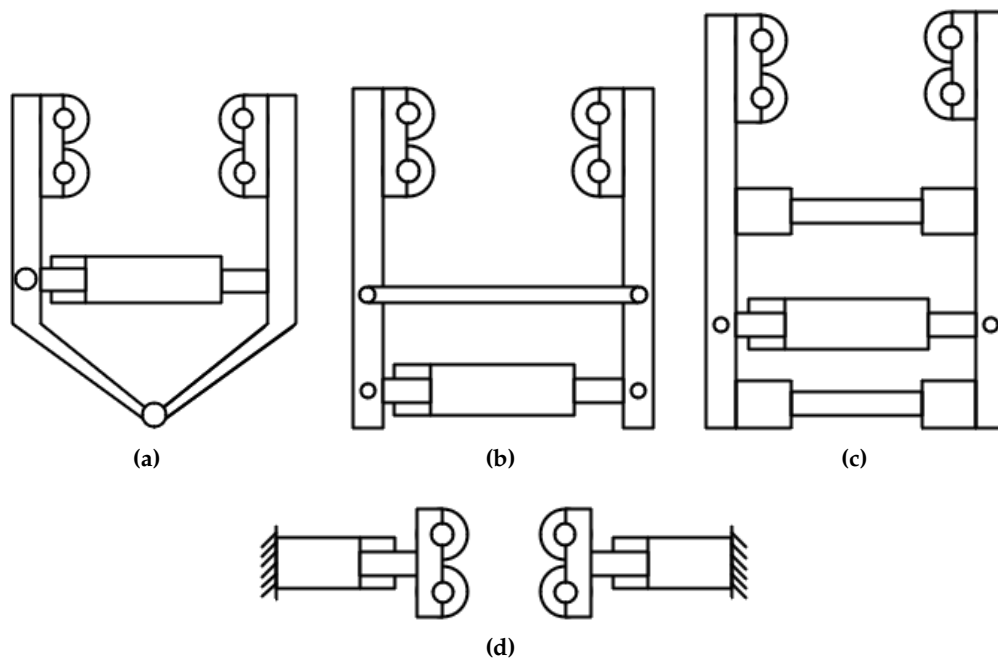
Spin buckle mechanism holding form.(a)V-shaped clamping structure.(b)H-type clamping structure.(c)Single hydraulic cylinder parallel clamping structure.(d)Parallel clamping structure with double hydraulic cylinders.
